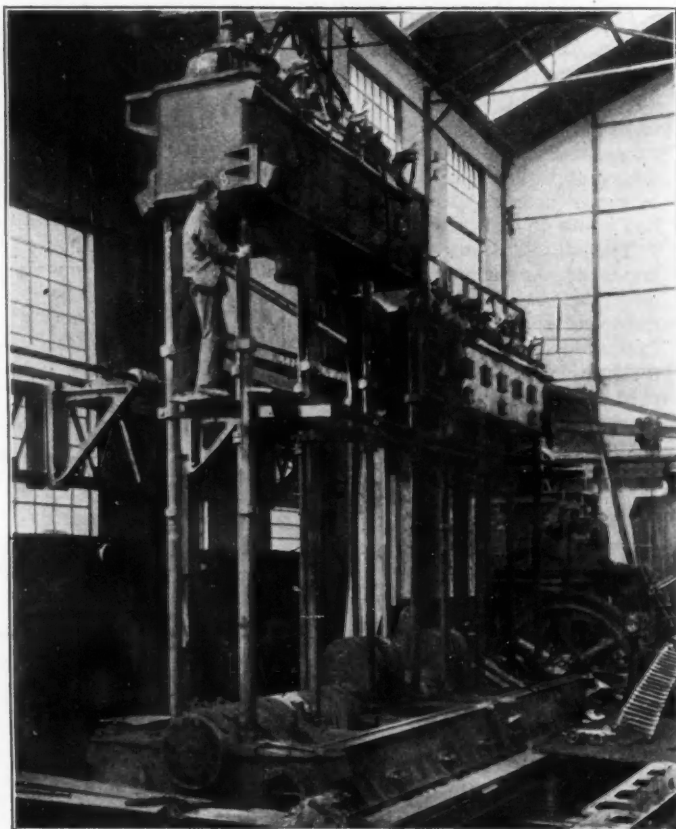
THE WERKSPOOR MARINE DIESEL ENGINE IN COURSE OF CONSTRUCTION
